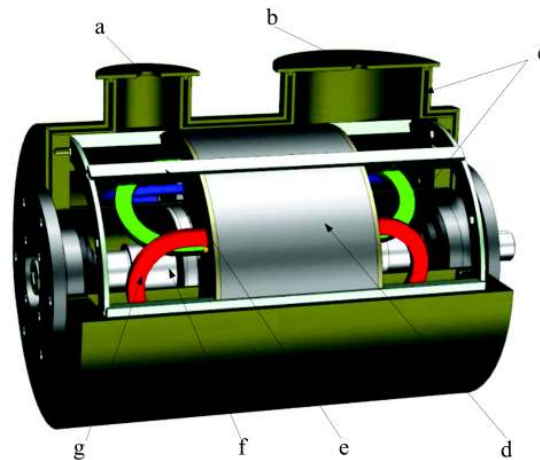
Illustrations for the possible cryogenic system structure with the complete motor; (a) liquid nitrogen inlet hole, (b) pumping hole; (c) thermal insulation layer; (d) stator part; (e) support frame; (f) rotor part and (g) HTS coil.
